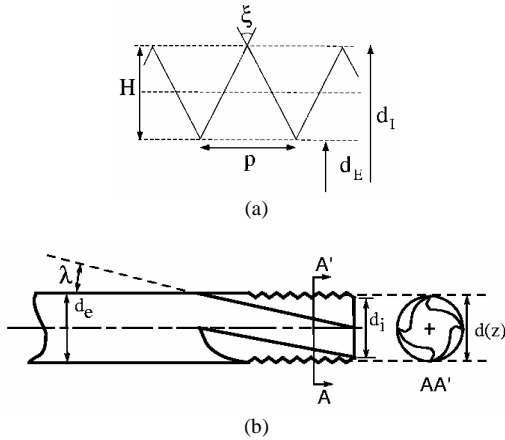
Tool and thread geometries (a) Thread geometry, (b) Tool geometry.
